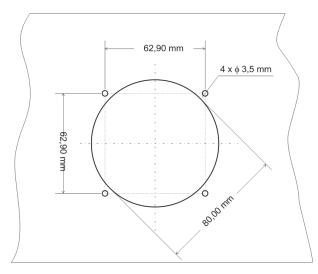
Mounting hole and screw holes measurements (not to scale)
